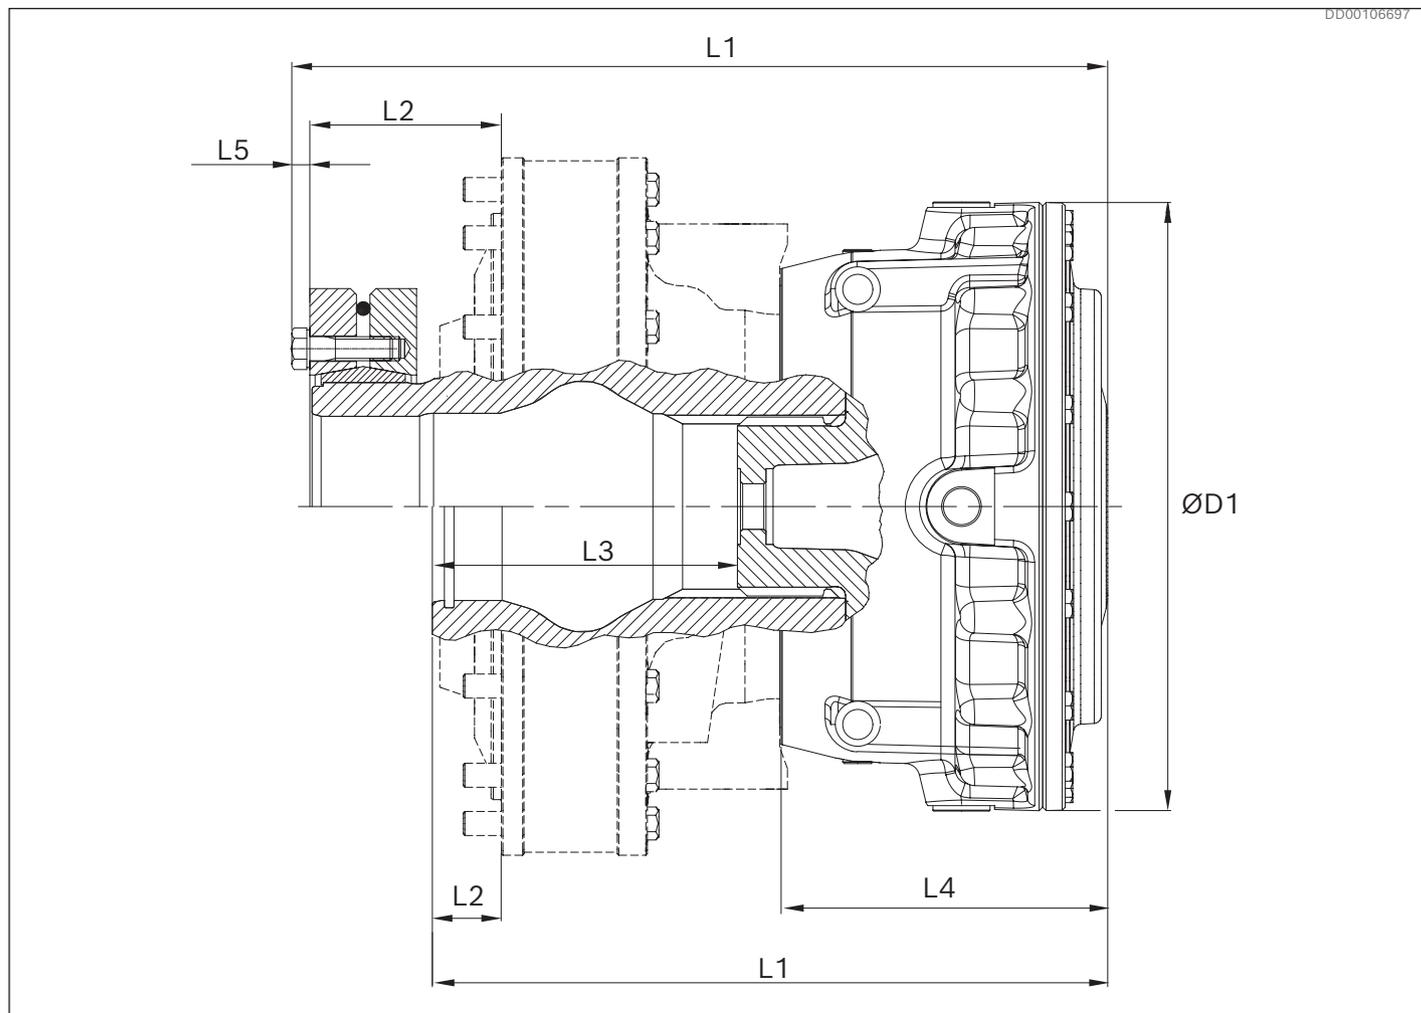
Dimensions MDA 5 to MDA 10 mounted on motor
